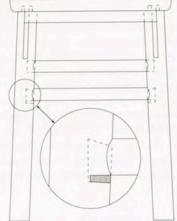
Drawing of a typical zigzag joint found on the end aprons of recessed-leg tables
